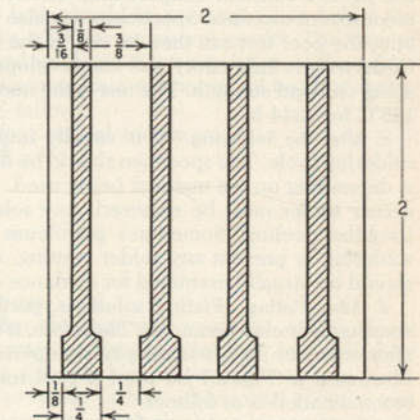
Copper peel strength pattern. Dimensions are in inches.
